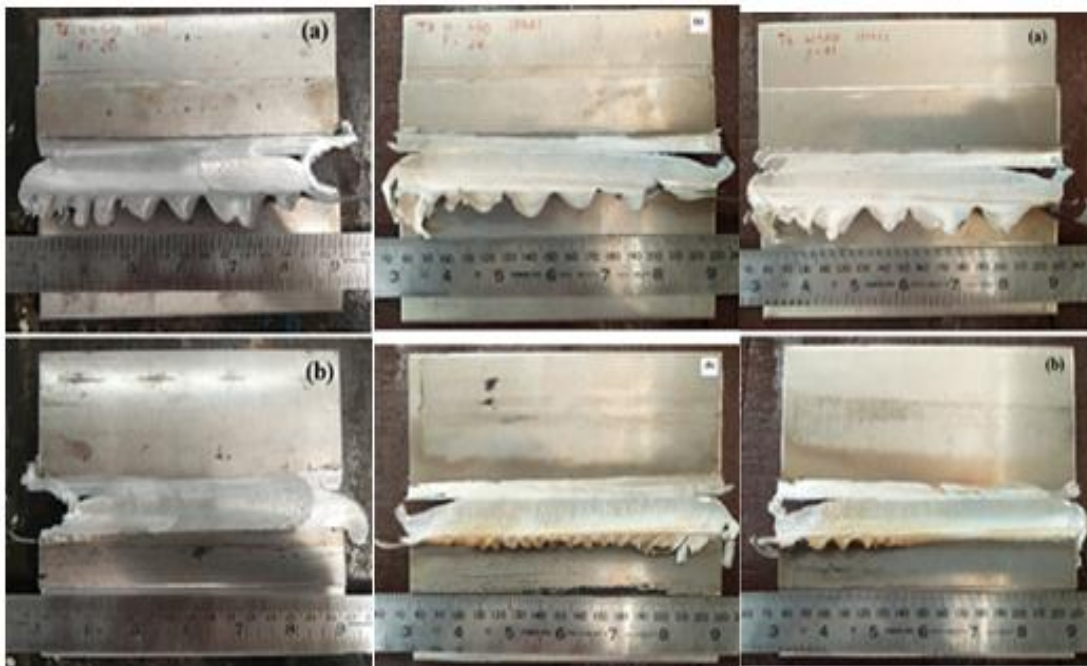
(left) Weld formation in experiment-6, (a) Top surface, (b) Bottom surface; (middle) Weld formation in experiment-7, (a) Top surface, (b) Bottom surface; (right) Weld formation in experiment-8 (a) Top surface, (b) Bottom surface
